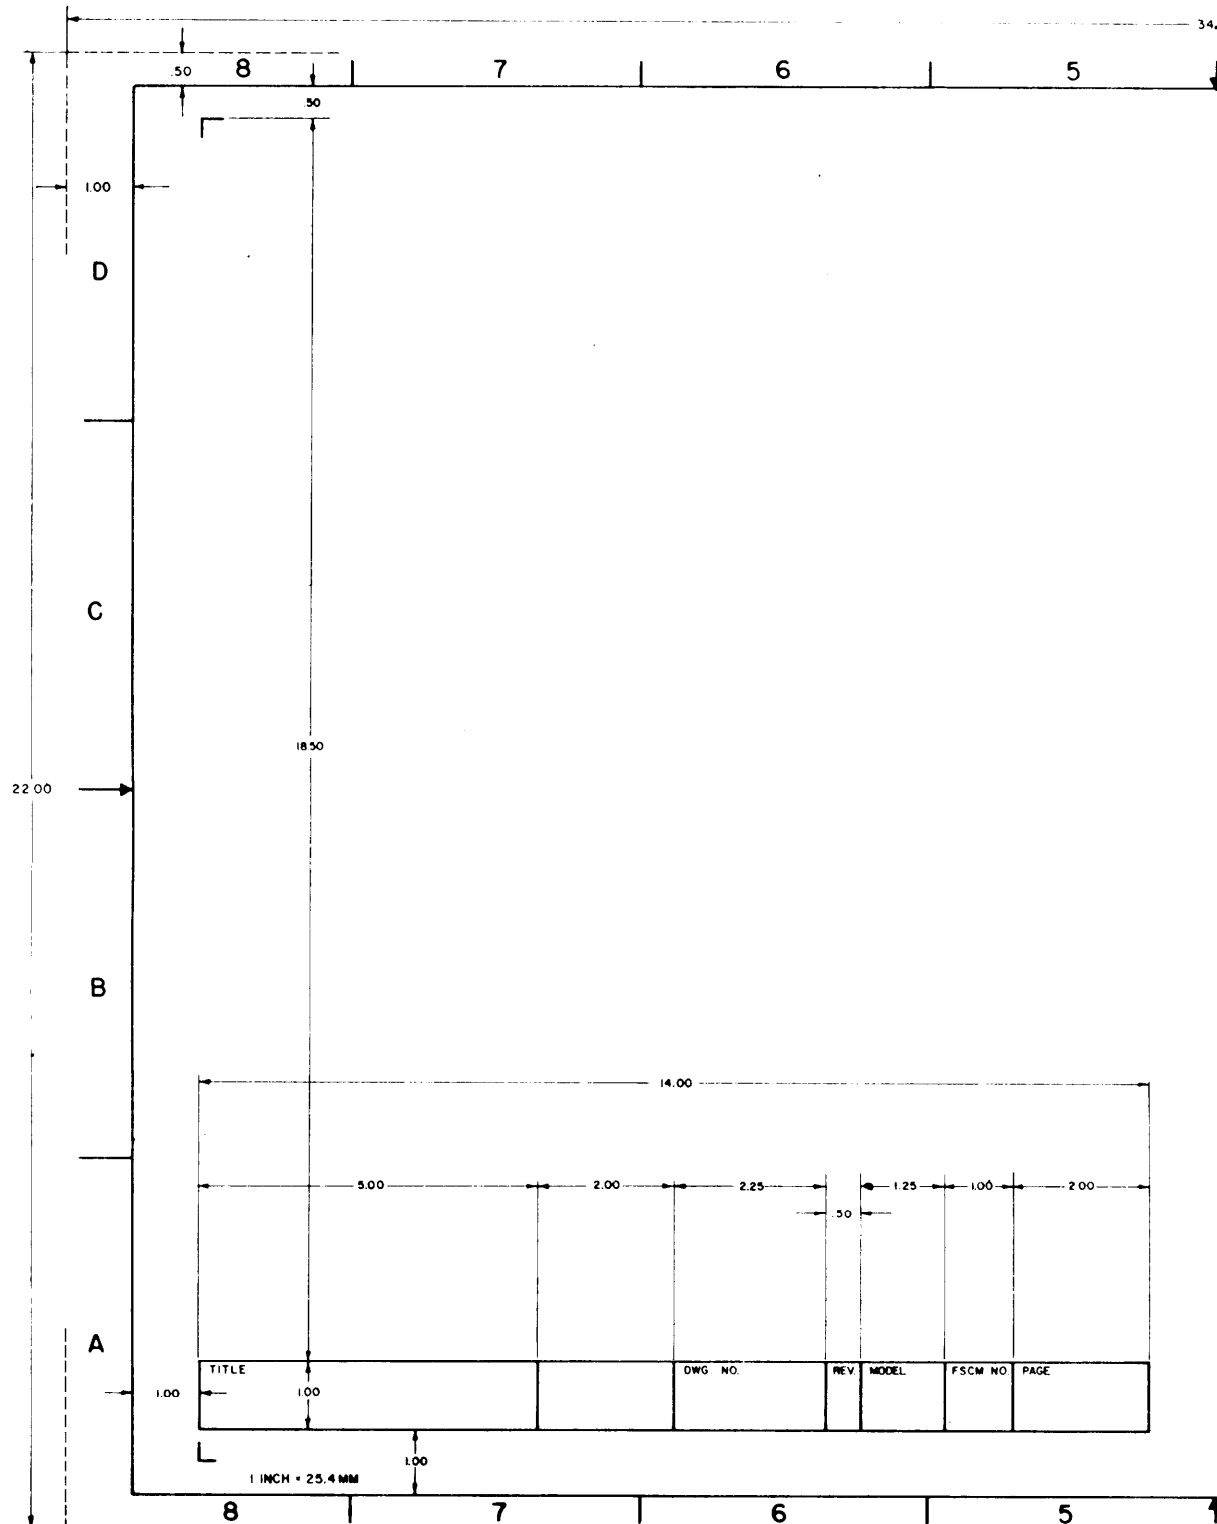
DRAWING FORMAT (D SIZE) (SHEET 1 OF 2)
